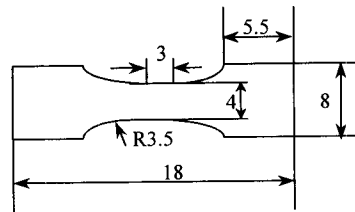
Dimension of in situ test specimens with thickness of 3 mm.
